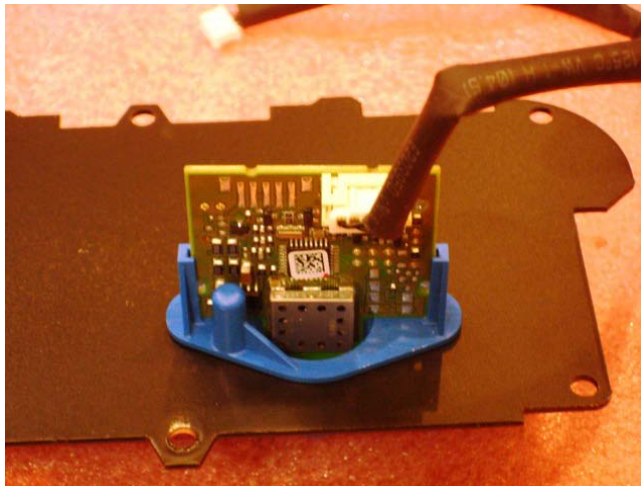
Luxon Wireless 2450 enclosure positioned in the hole mounted to the front plate
